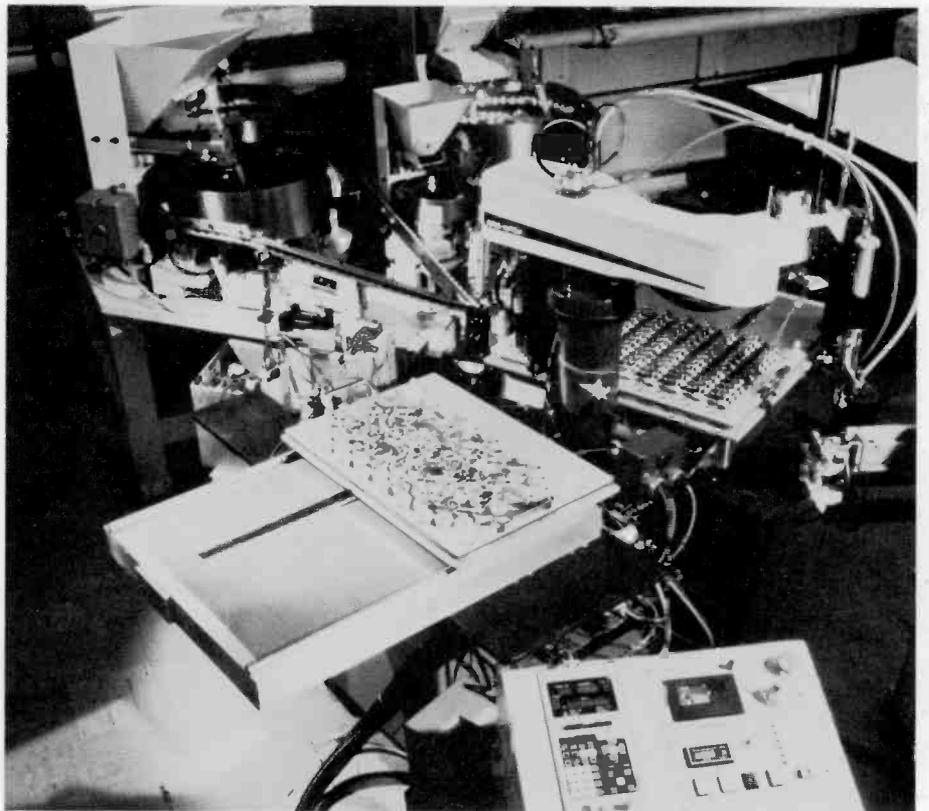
The Hirata gearbox assembly system, without its protective Plexiglas envelope, is shown in the Laboratories environment.
